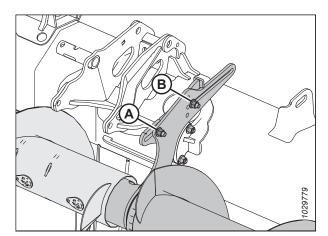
Initial Position of Adjustable Mounts – Three-Piece Auger
